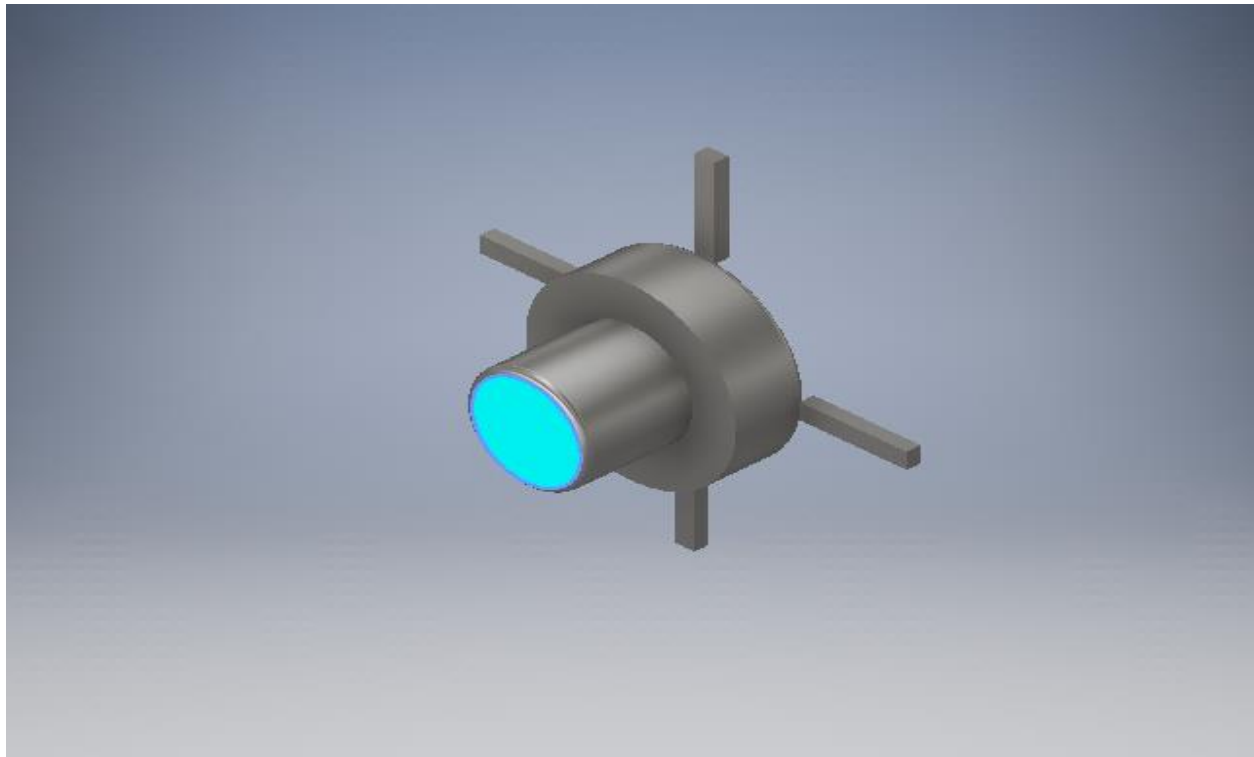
Solid View of Wind Turbine Rotor Showing Reaction on Shaft
